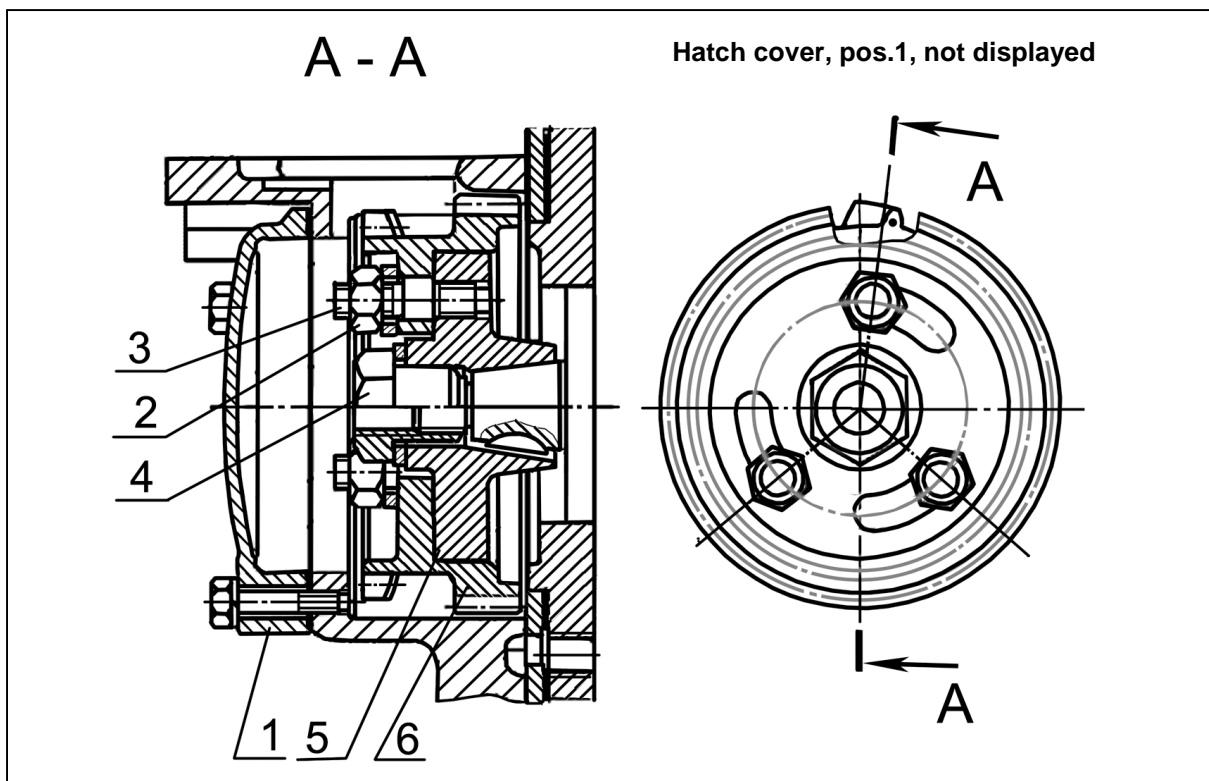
Mounting a detent in the hole of rear plate and flywheel.
